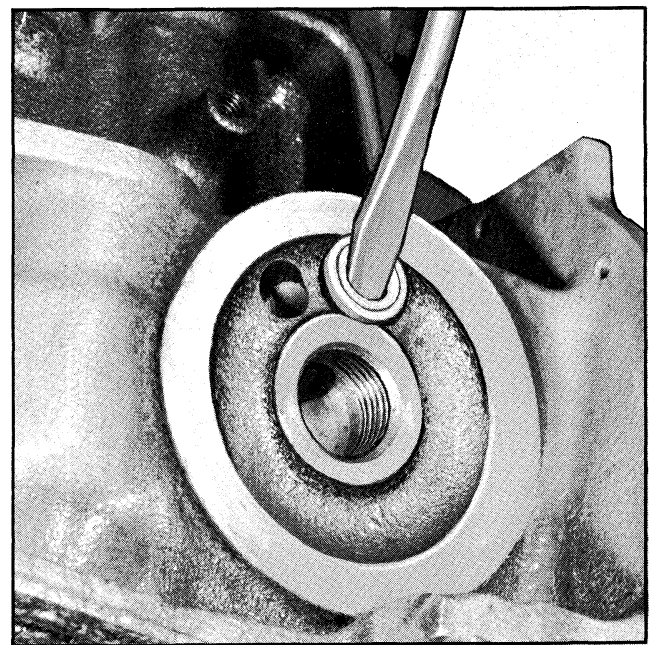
A-31 Removing Oil Filter By-Pass Valve
